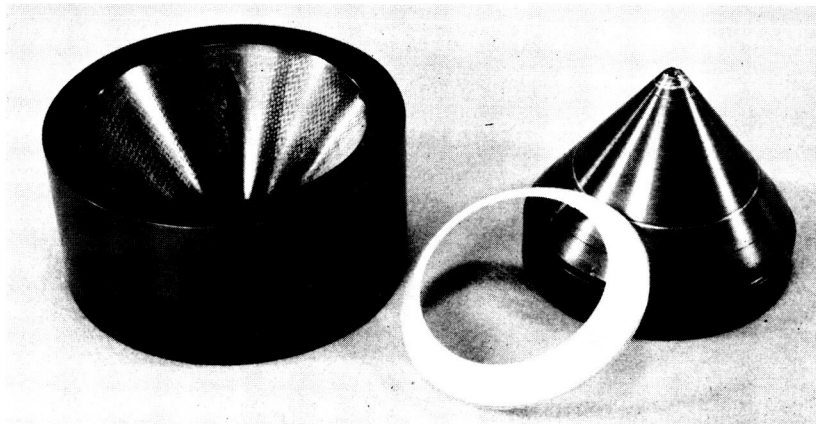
Lip Seal Laminating Tool Shown with Finished Lip Seal
